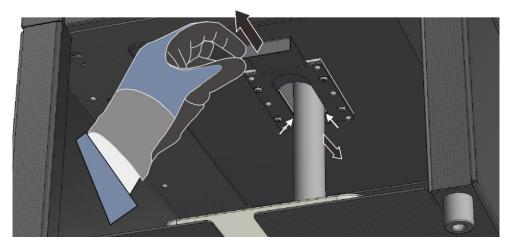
Opening the slider for sealing the opening (similar to picture)
